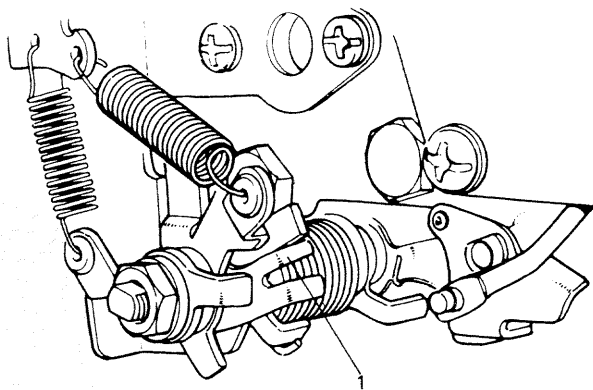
Clearance between throttle valve and carburetor bore
